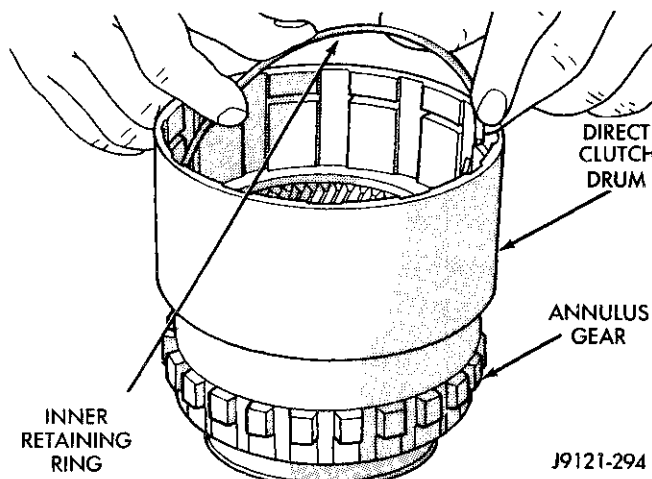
Installing Clutch Drum Inner Retaining Ring
